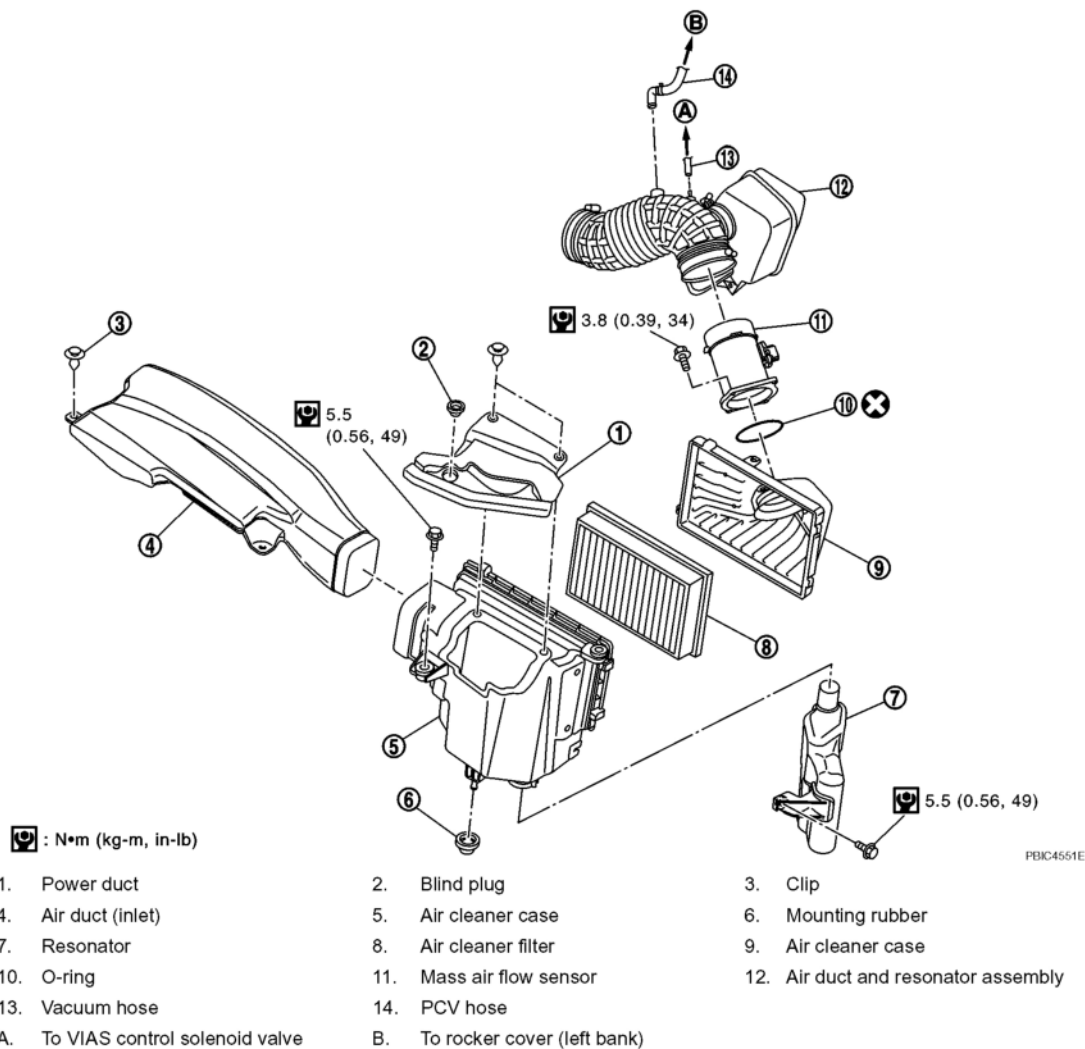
Identifying Air Cleaner And Air Duct Components With Torque Specifications
